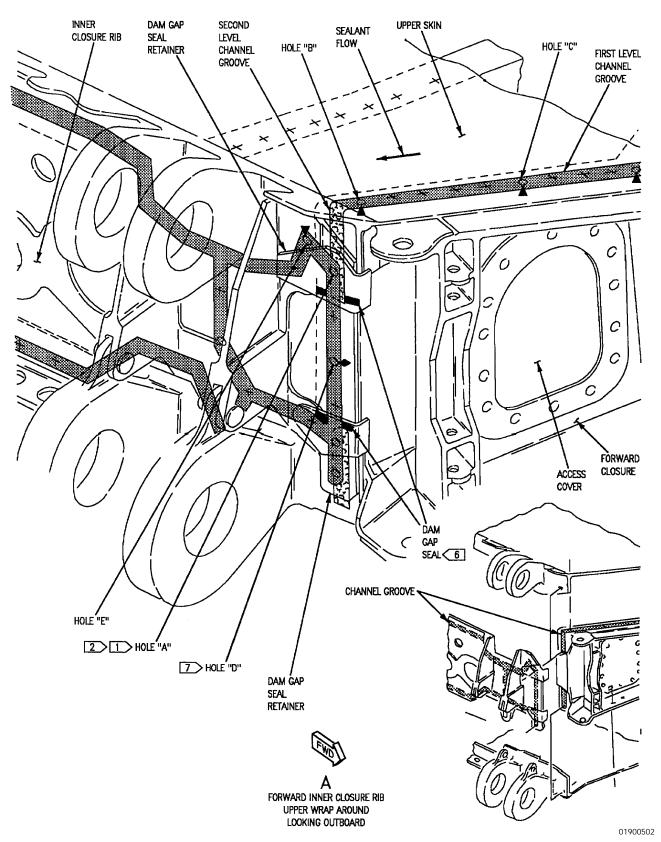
Closure Rib Channel Groove Seal Injection (Sheet 2)
